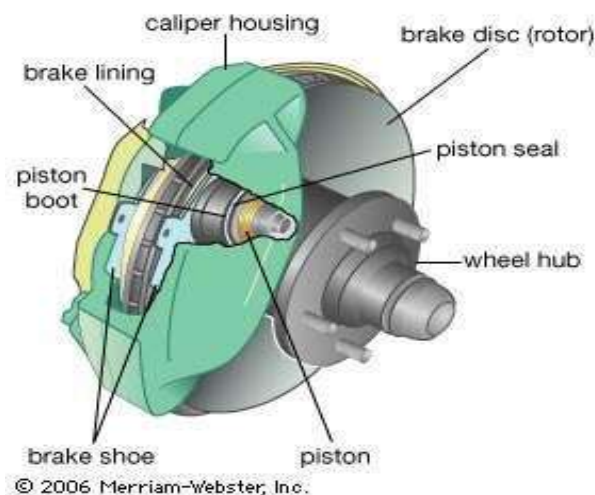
Disc Brake In Wherein, Alternative of Drum Fabrication, Rotor Attach to wheel Hub is Clamped between Callipers[10].
